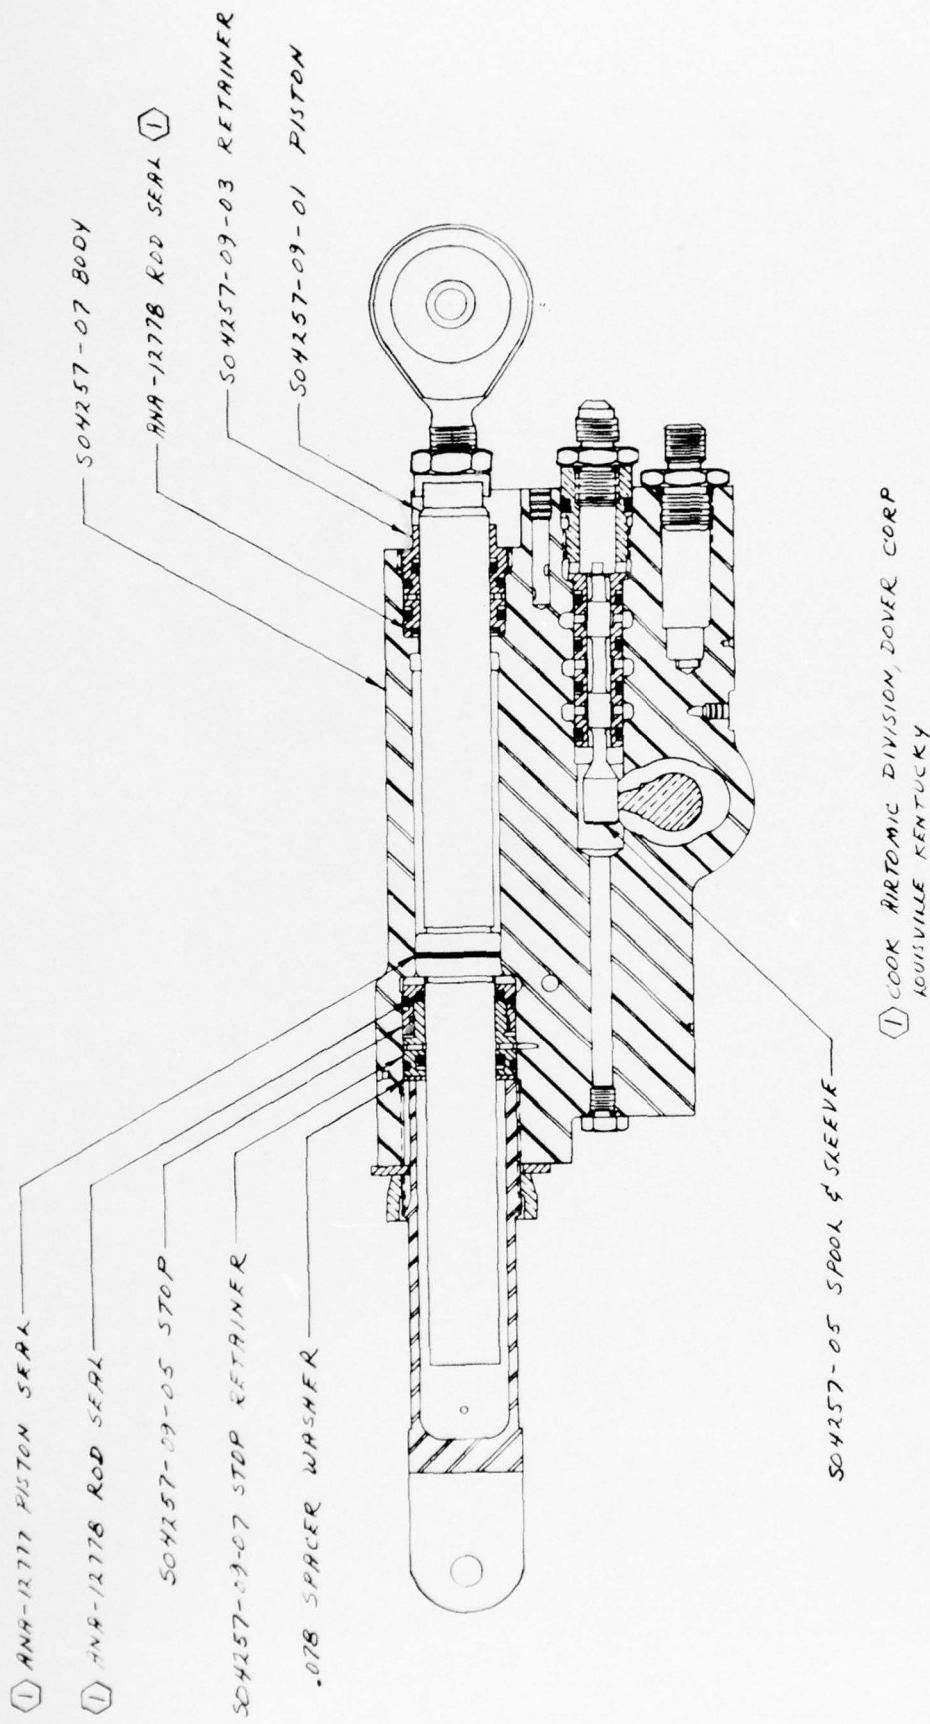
CROSS-SECTIONAL VIEW OF 8000 PSI AILERON ACTUATOR
